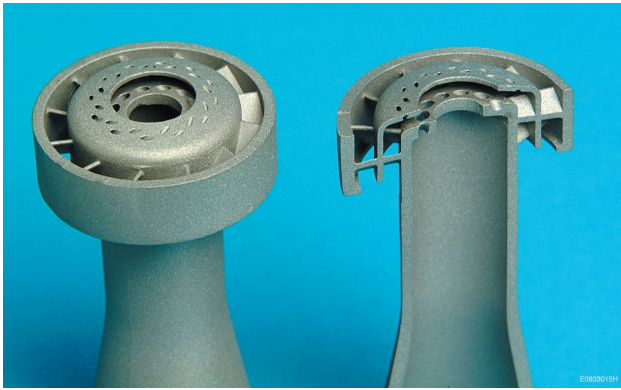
Swirler for gas turbine engine is a small part which replaced 27-piece fabrication.¹
